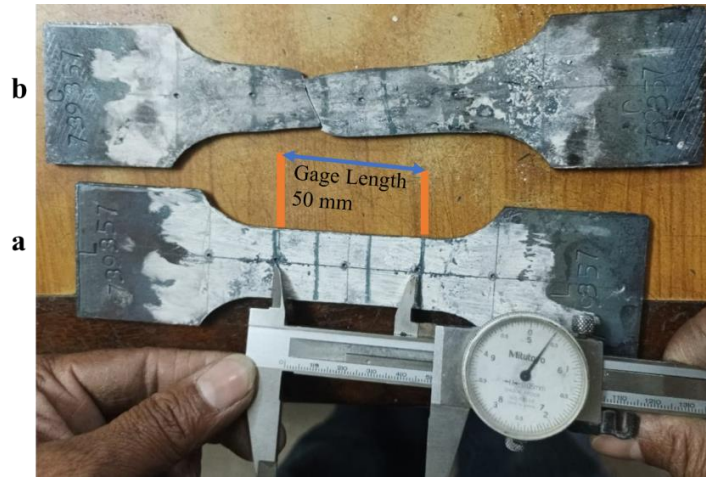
Tensile Test Specimen: (a) Before, (b) After the fracture
